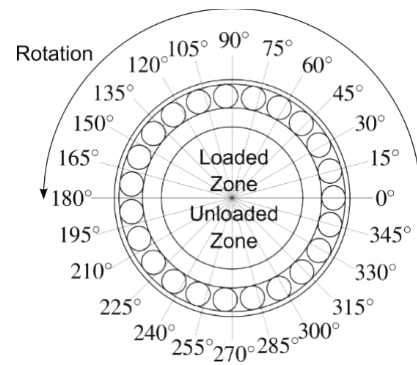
Bearing schematic showing direction of rotation relative to loaded and unloaded zones of the bearing.
